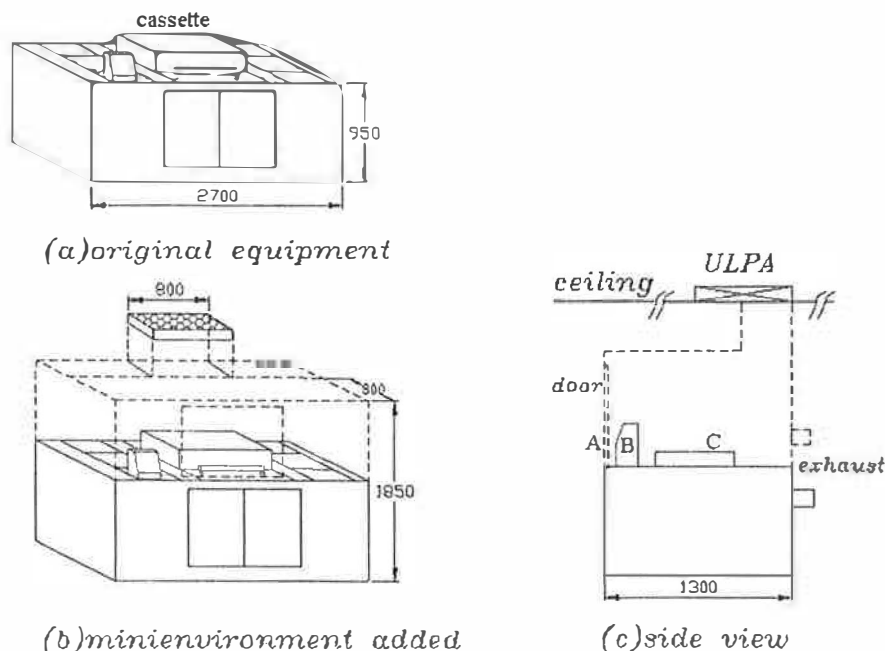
The spin coater and the mini-environment experimental design, dimensions given in millimeters.
